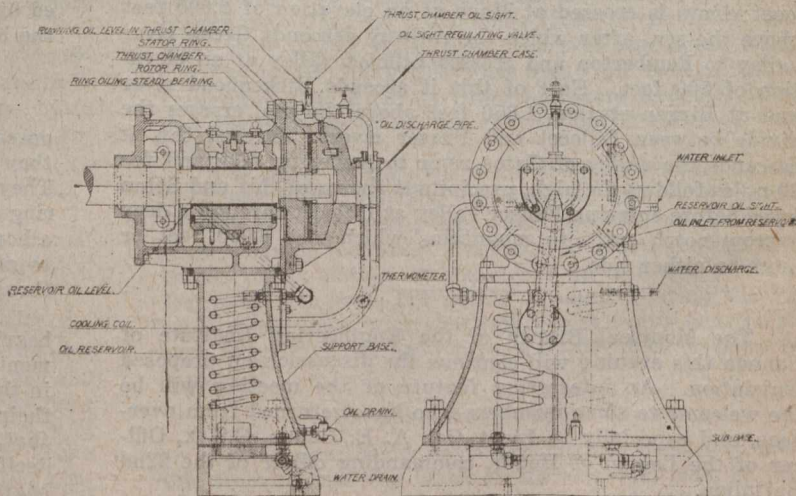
GIBBS BEARING ON HORIZONTAL SHAFT
